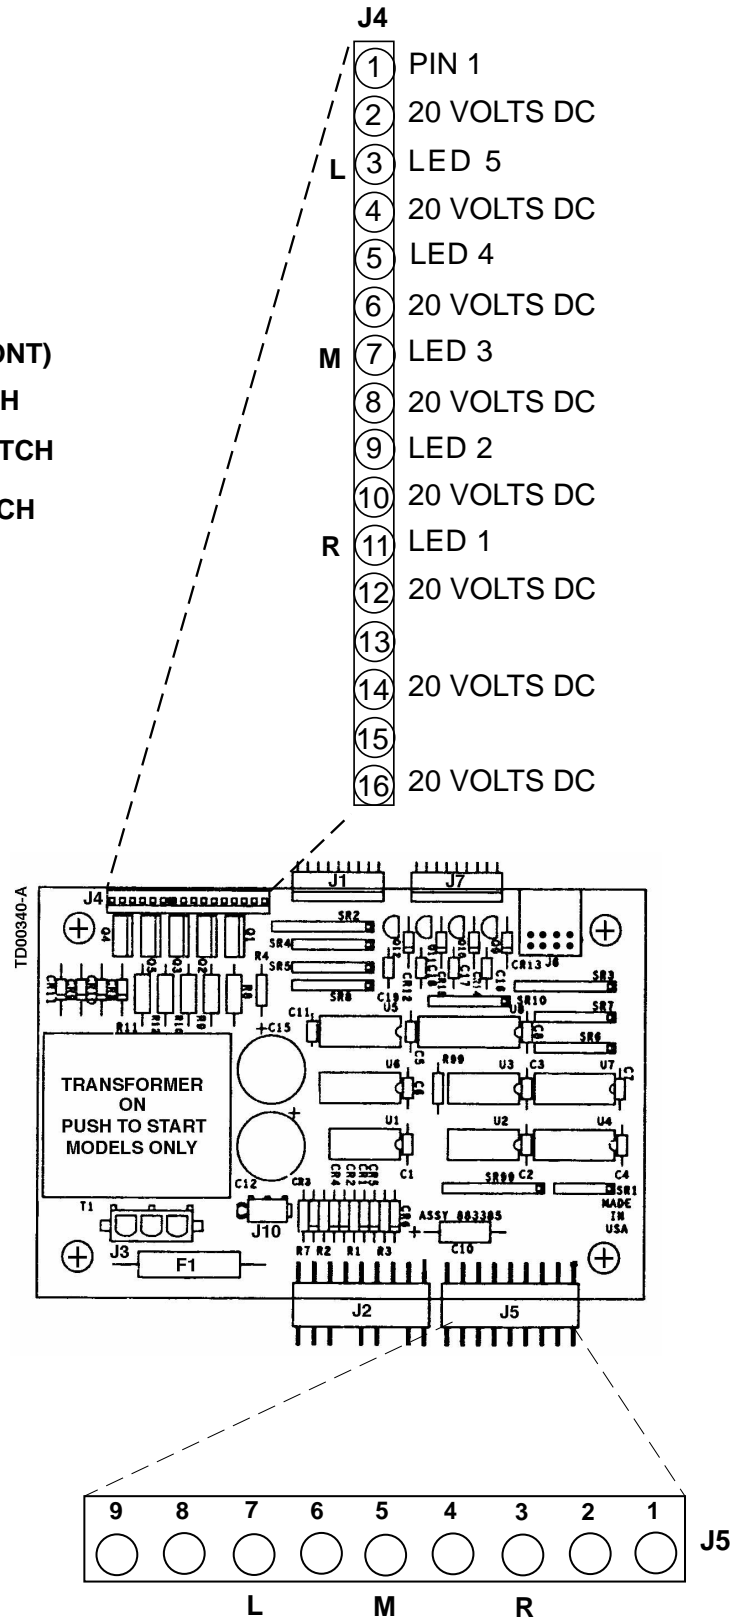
PUSH-TO-START SWITCH CONNECTIONS V390, 1/V390, V590, 1/V590 (SIDE 1)
